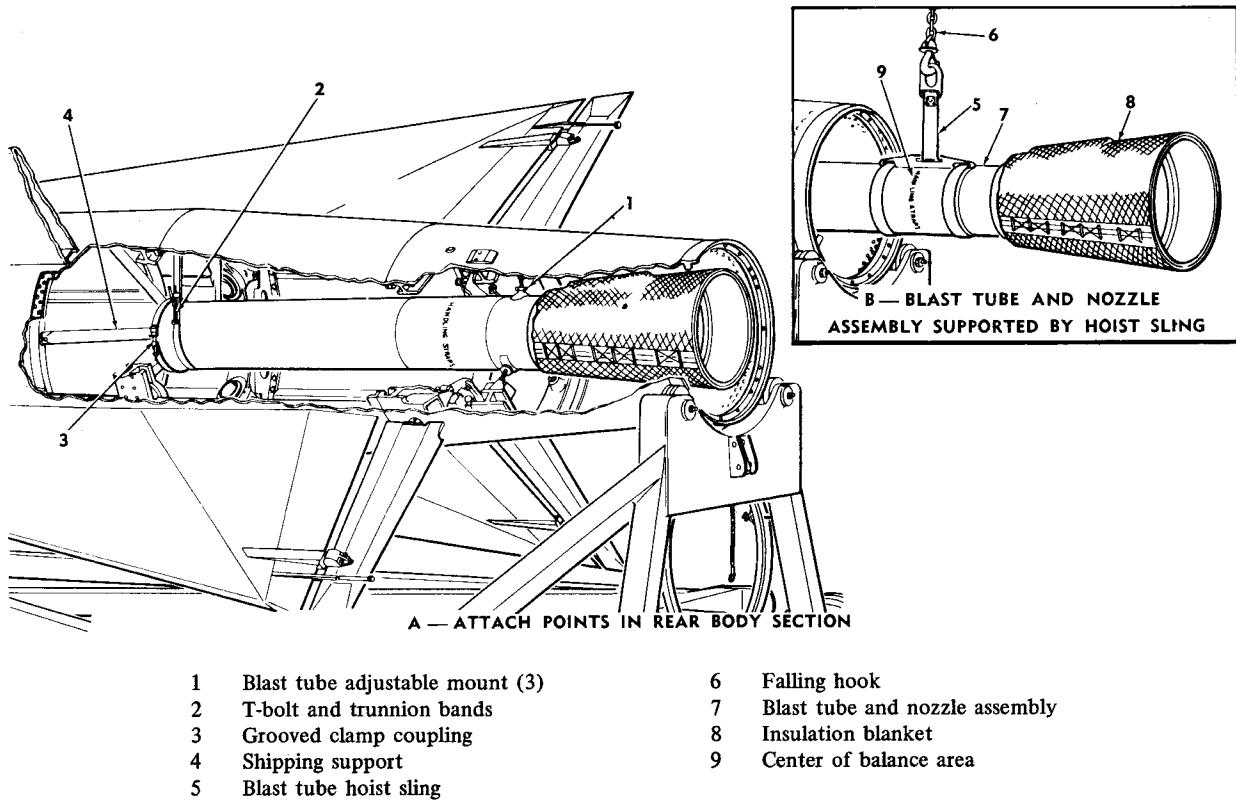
Blast tube and nozzle assembly --removal and installation.
